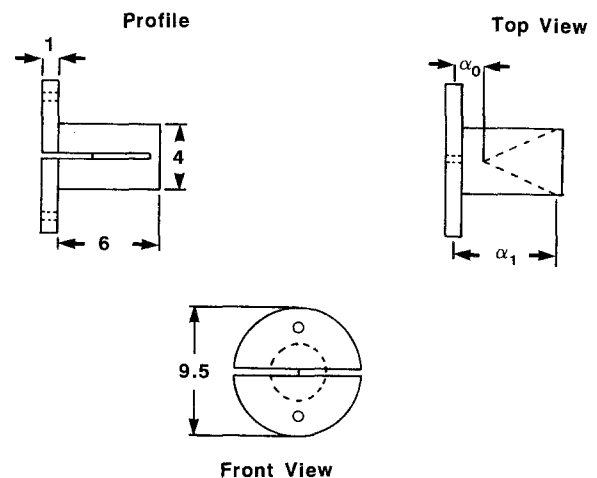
Miniature short-rod fracture toughness test specimen geometry.
